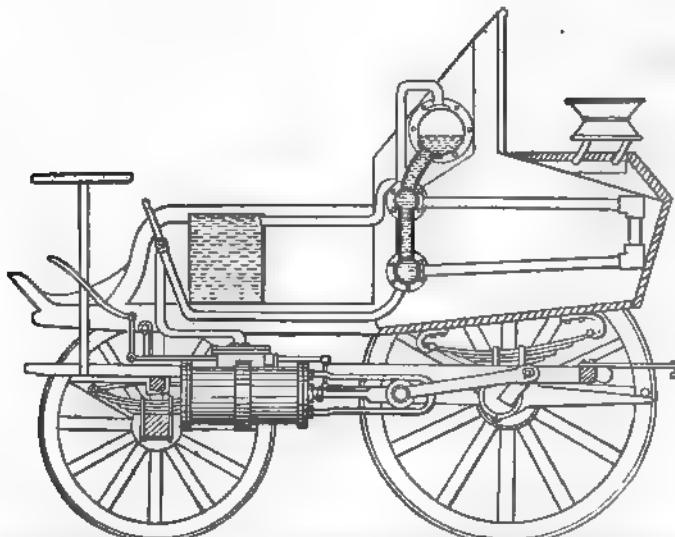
Sectional Elevation of one of Goldsworthy Gurney's Early Coaches, showing water tube boiler, directly geared cylinders and peg rod driving wheel.
